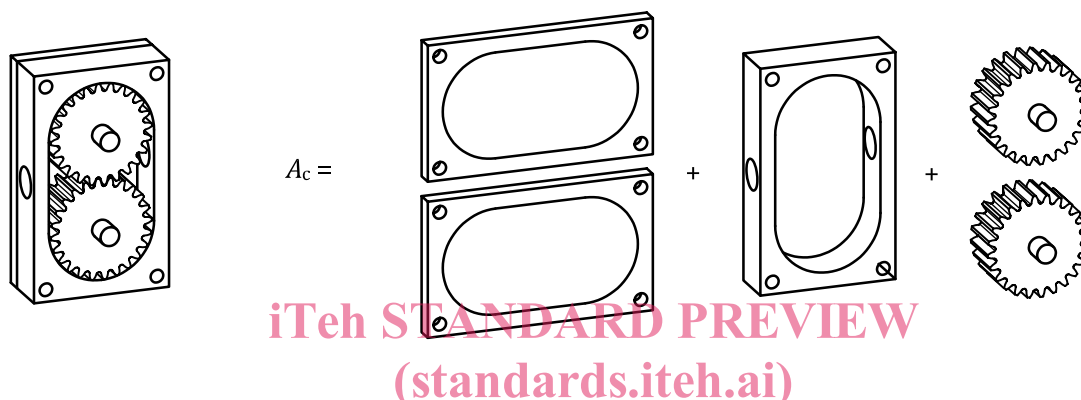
Diagrammatic representation of the wetted surfaces of a hydraulic gear pump
